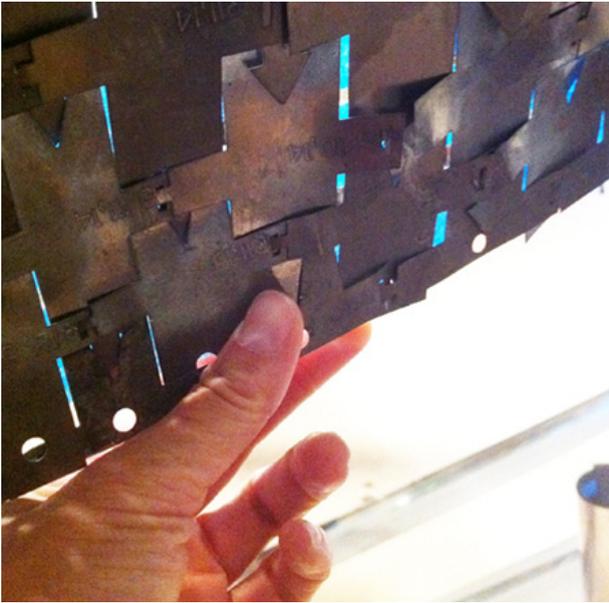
Proportions of details should be designed to accommodate the fabrication tool AND the assembly system.
